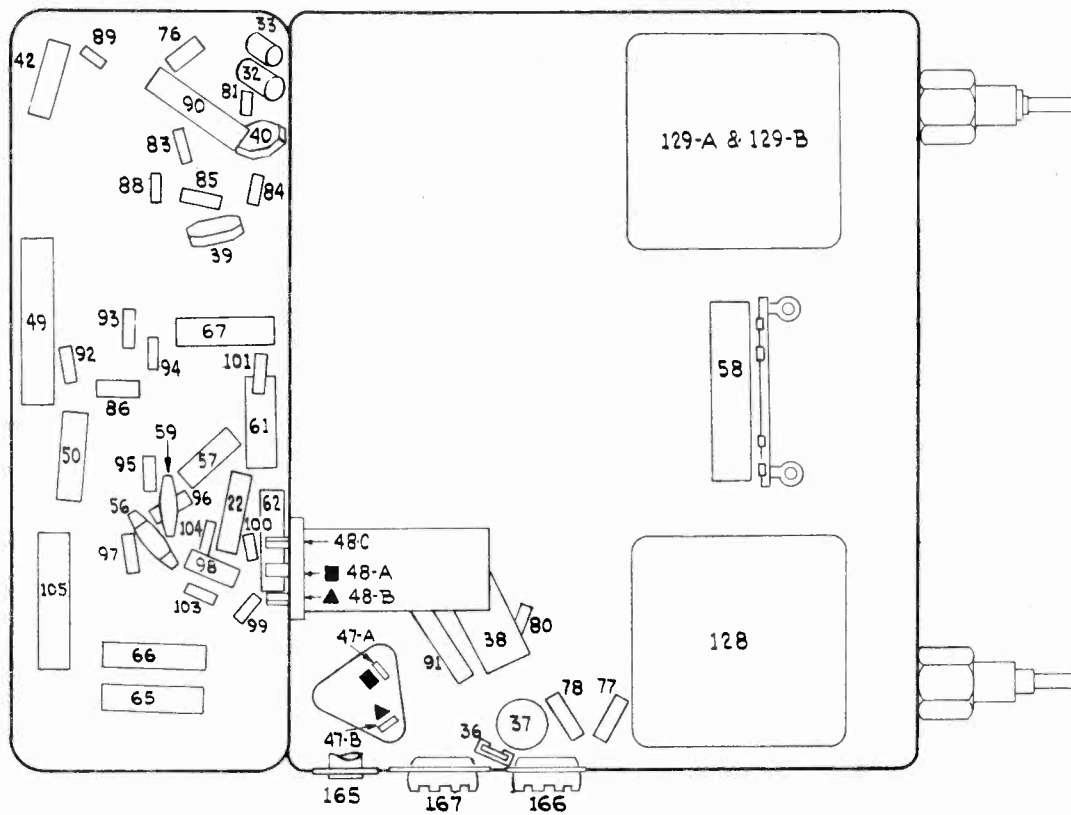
PARTS LOCATING DIAGRAM (TOP VIEW)—RADIO 985794
